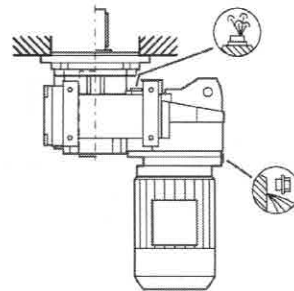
Mounting positions for parallel shaft gearbox F.AD shaft-mounted design, sizes 39 - 189
